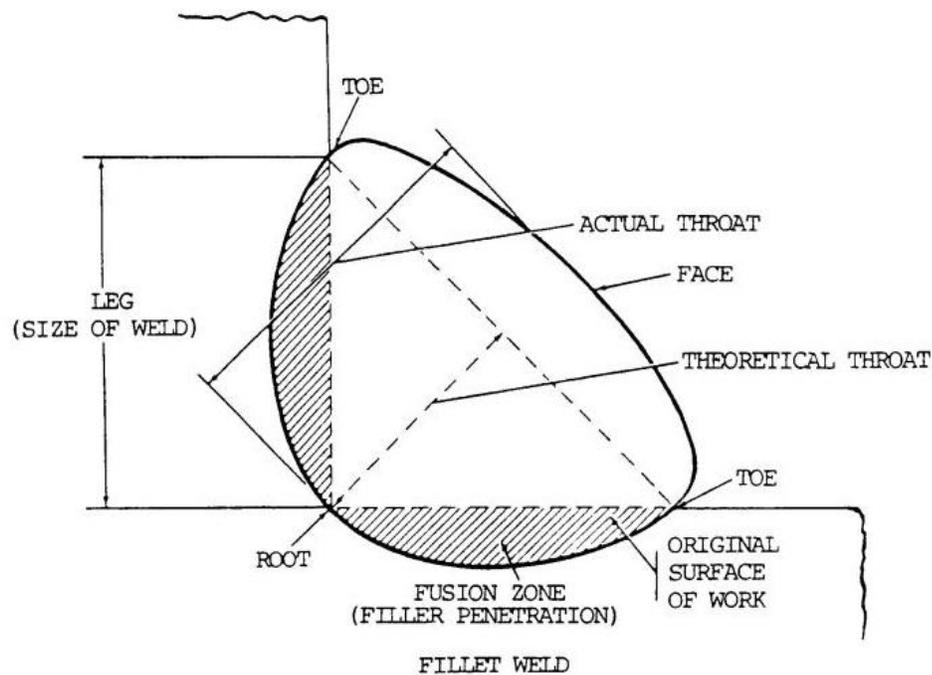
Illustrated figure of fillet weld geometry
